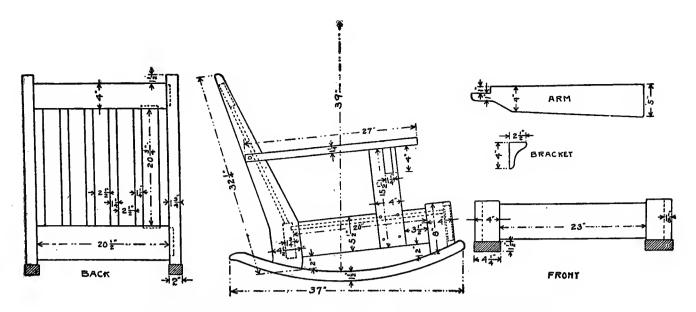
B—HOW TO MAKE A BIG EASY ROCKER
